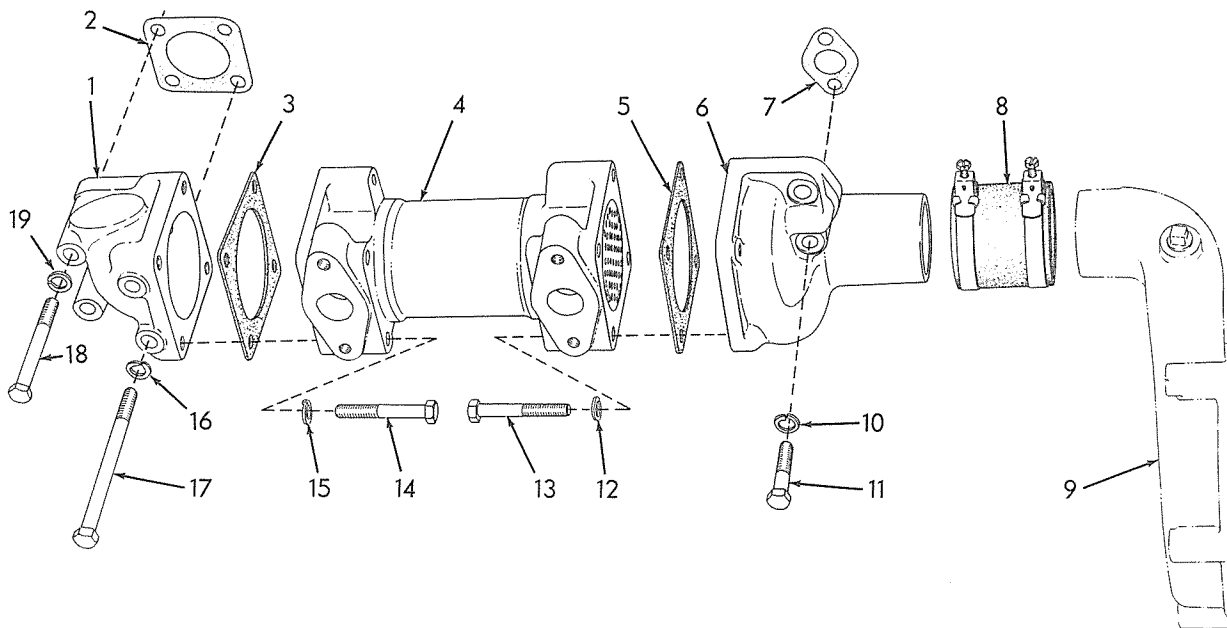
Engine Oil Cooler Details (Motor Graders)
